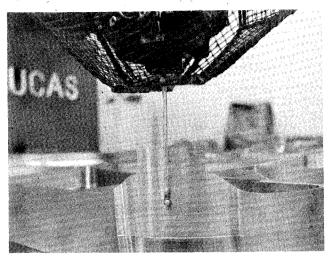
Lucas inspection probe measuring a bulkhead flange.
